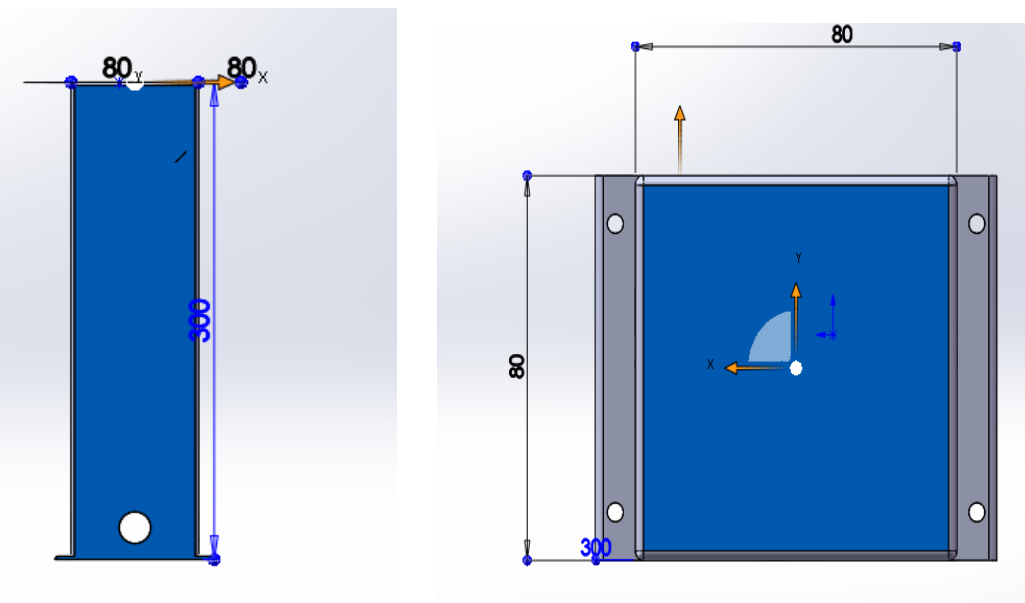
Dimensional Measurements of UV lamp holder on SolidWorks
